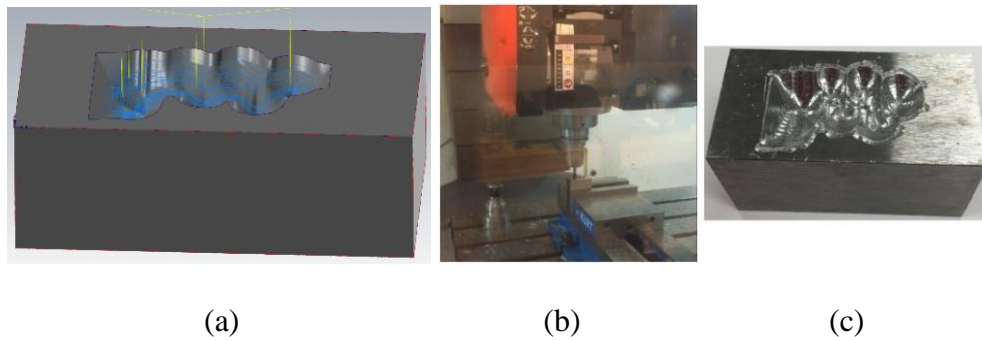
(a) Machining toolpath; (b) Machining setup; (c) Machined substrate
